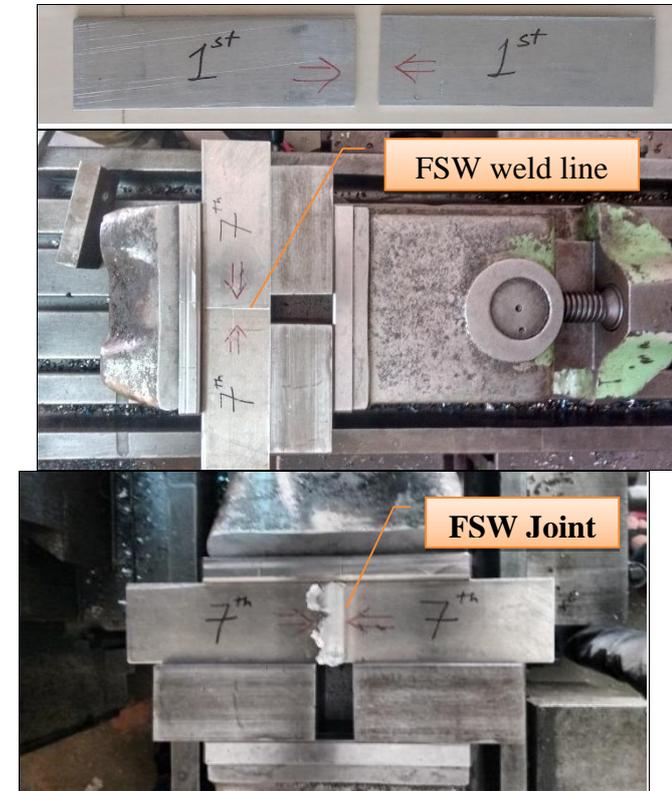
I). Pair of base material workpiece, II). Pair of welding plates clamped on the clamp of a Vertical Milling machine, III). Plates after completion of weld.
